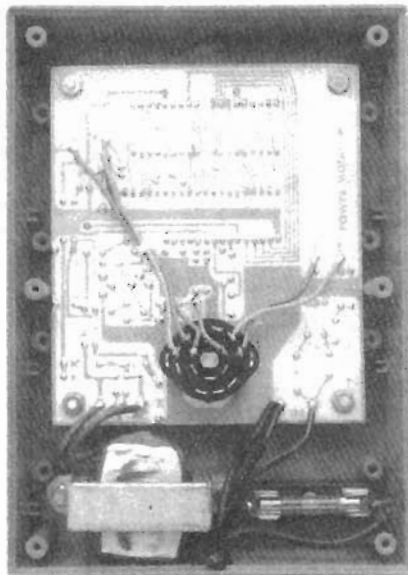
VOLTS-NOISE SWITCH S1 is mounted on the foil side of the PC-board. Its connections are tack-soldered to the appropriate solder pads.
